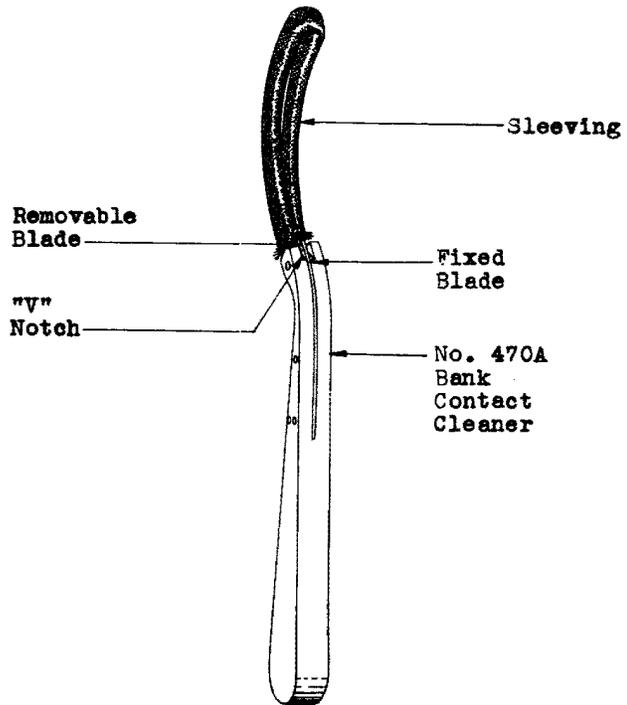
Removable Blade of No. 470A Bank Contact Cleaner Inserted in "V" Notch
